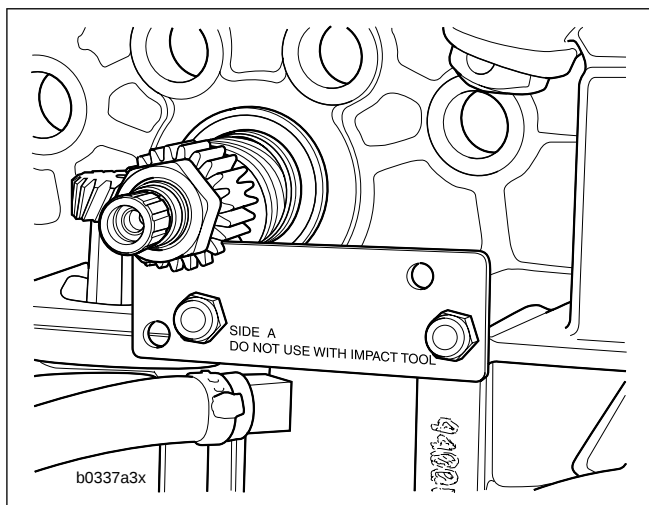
Crankshaft Locking Tool (HD-43984)
